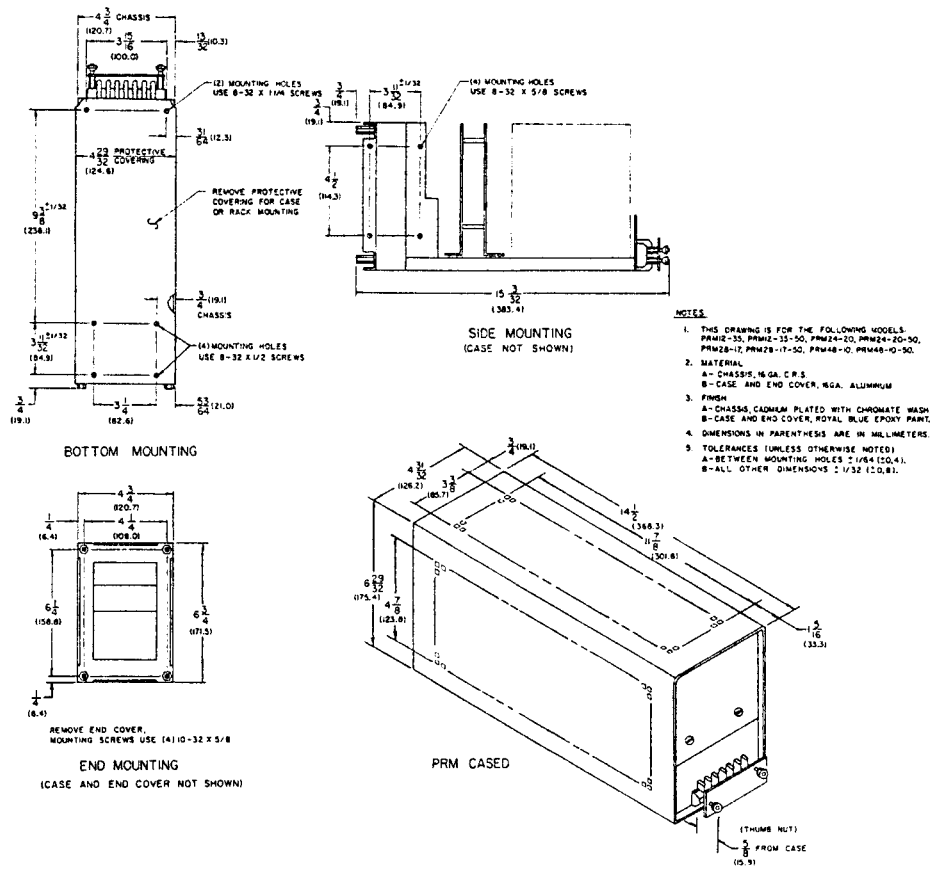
MECHANICAL OUTLINE DRAWING, PRM 450 SERIES.
